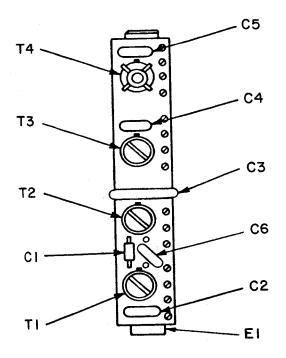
3 MHz Subassembly A2A4A21, Component Locations
